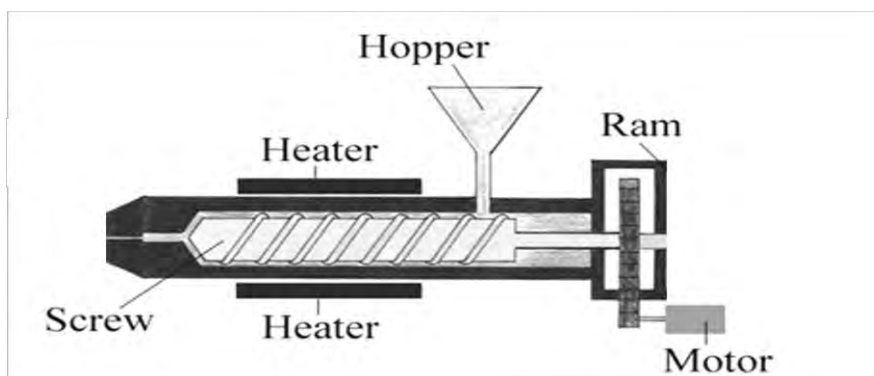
Schematic diagram of an extrusion machine.
